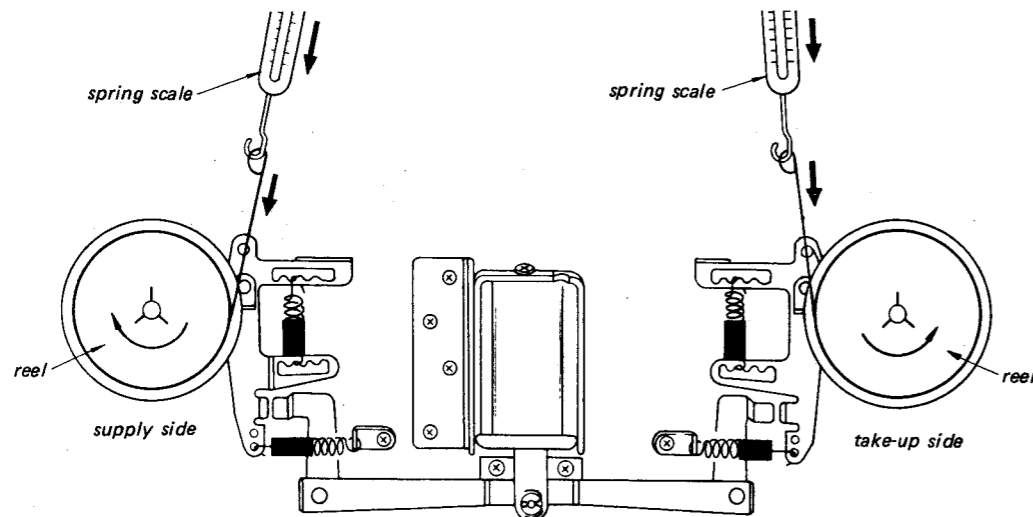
Take-up tension and back-tension adjustment of reel table
